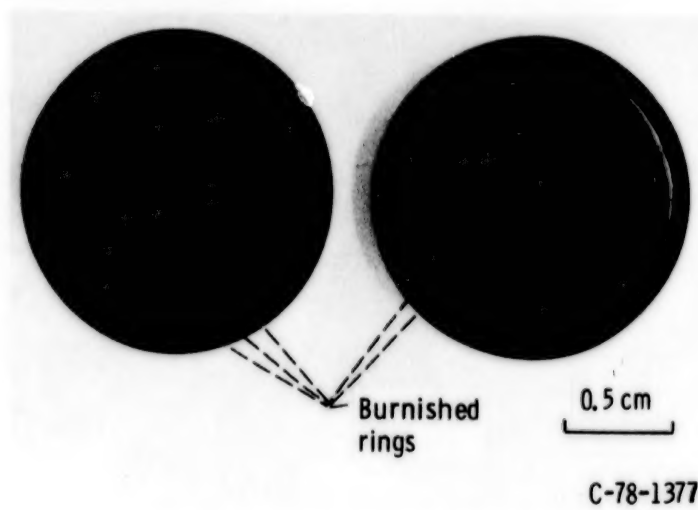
Test-bearing rollers after test, showing concentric, burnished rings.
